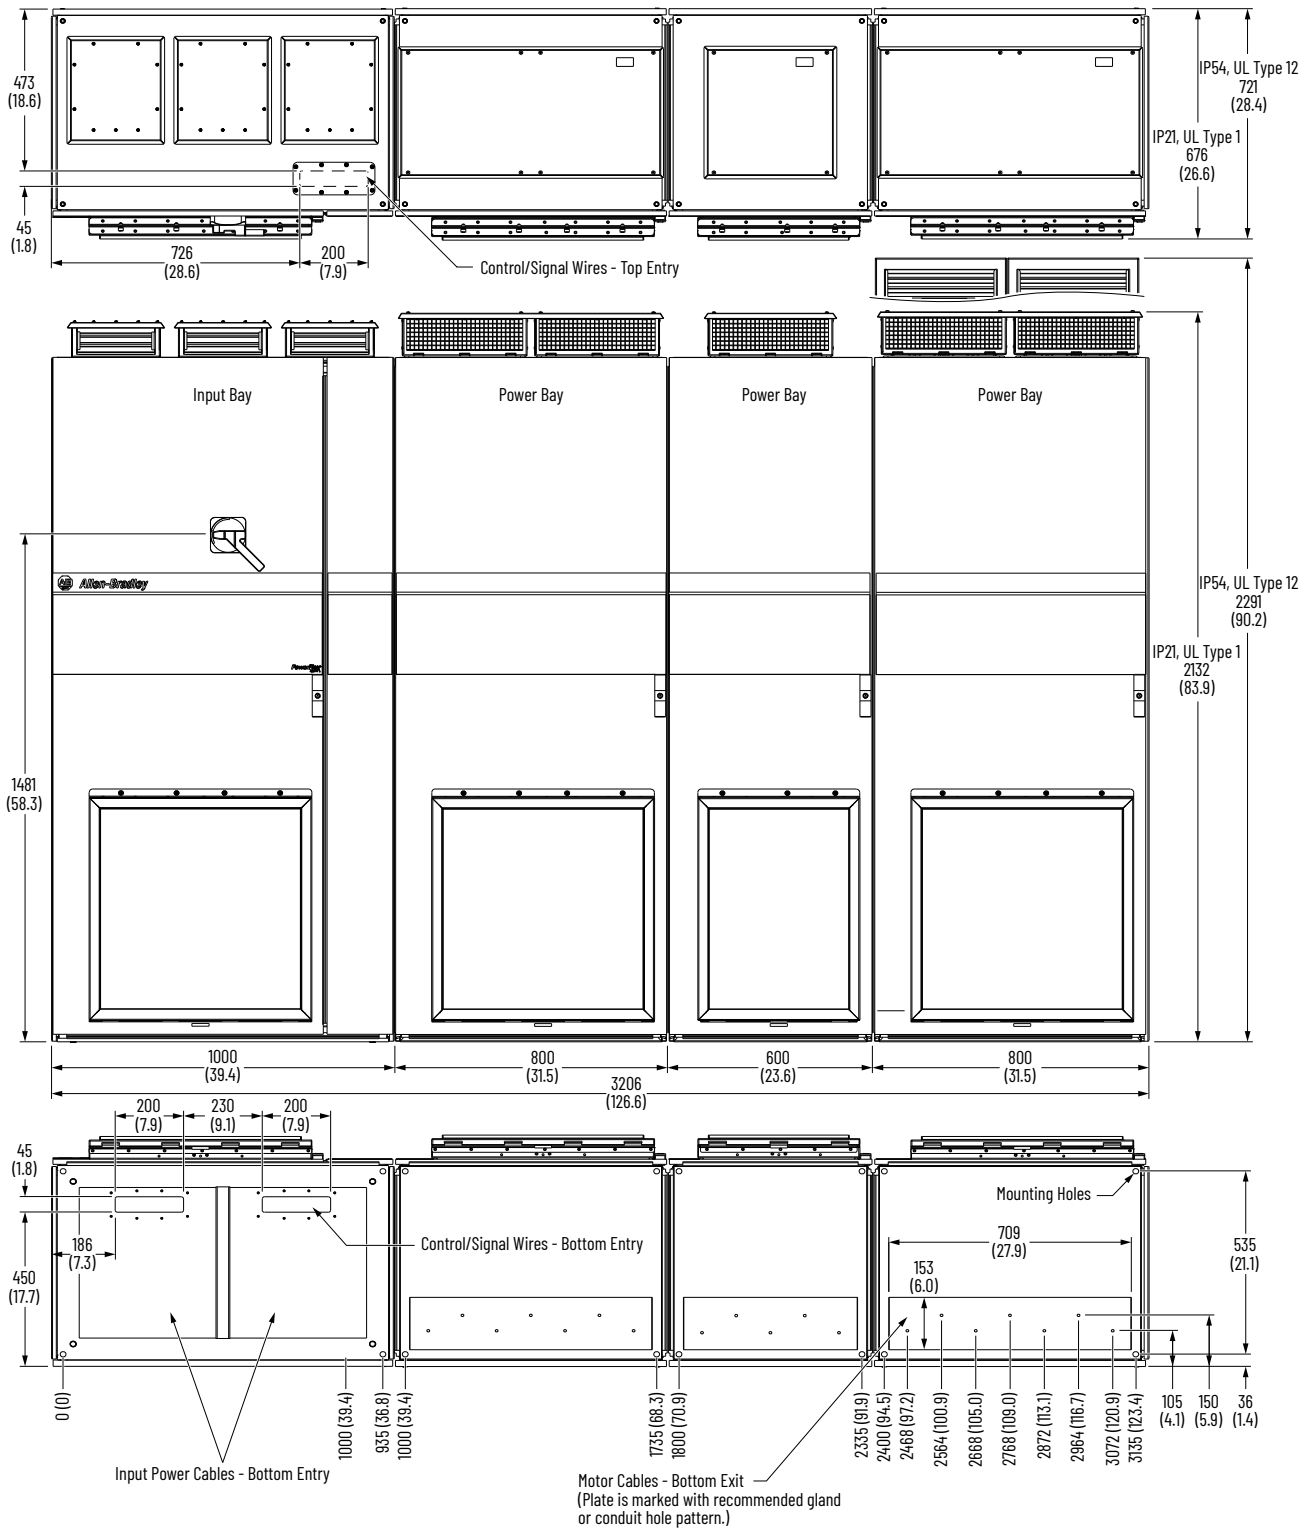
Frame 9 Drives—Top, Front, and Bottom Views—Dimensions are in mm (in.)
